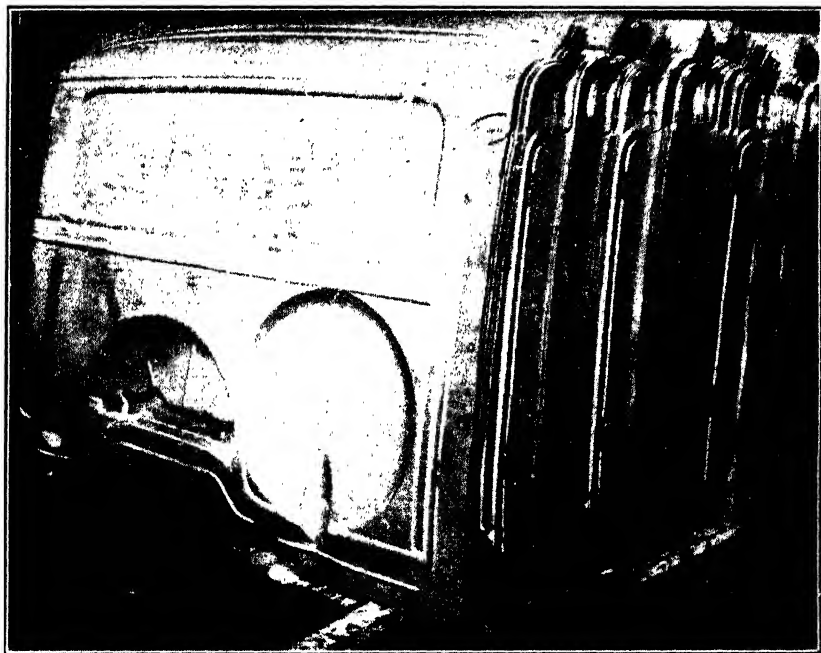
A typical triple-action automotive stamping, the side of a light truck body. Note the draw beads and note also how irregular must be the shape of the blank-holding surfaces.
